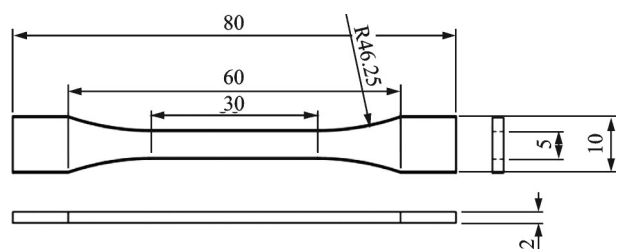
Dimension of tensile specimens (JIS K 7161 1BA^[14])
